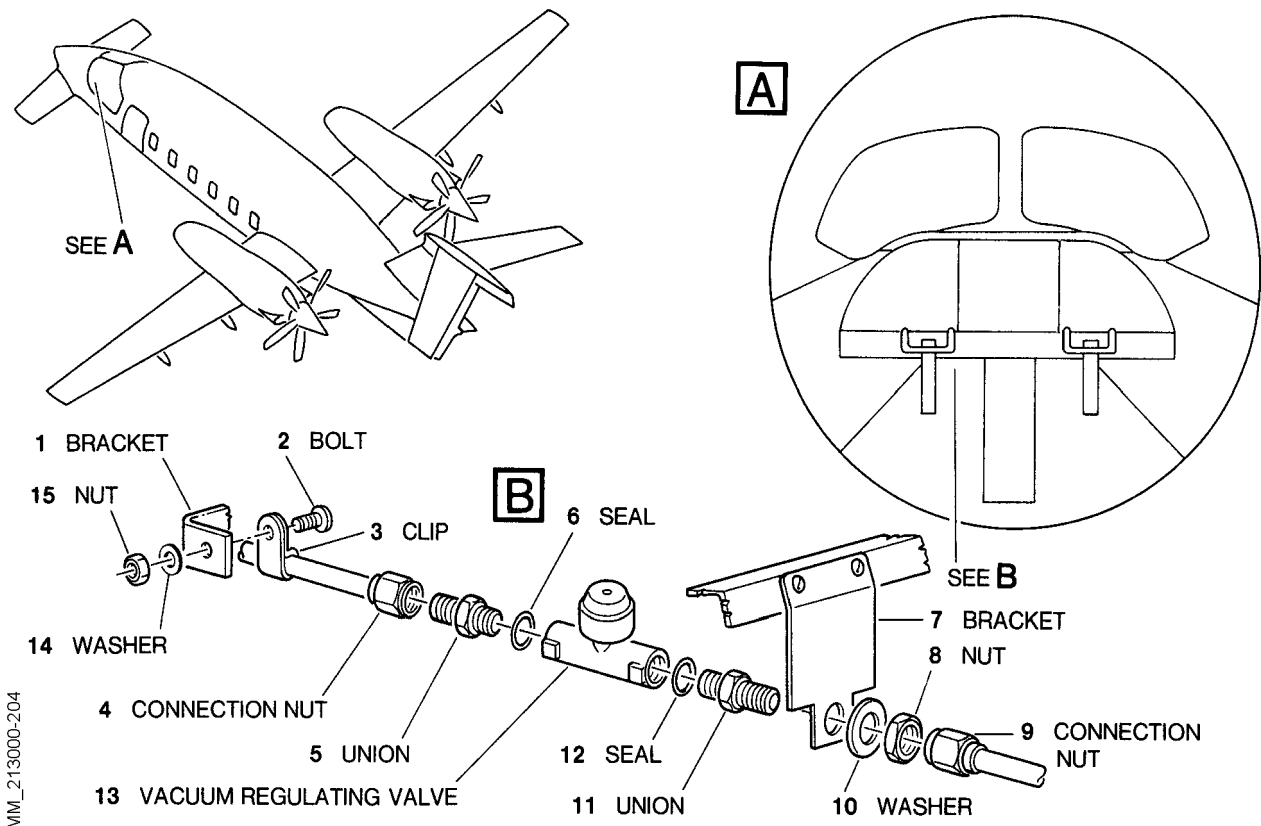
Vacuum Regulating Valve - Removal/Installation
